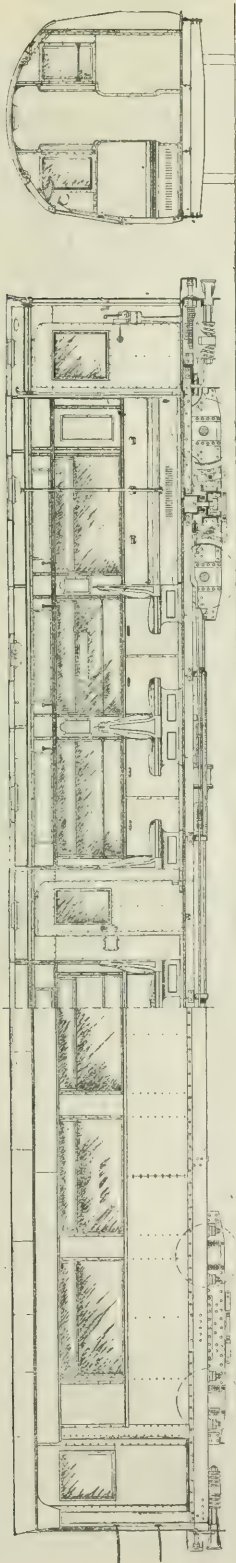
ELEVATION AND SECTION OF NEW BAKERLOO TRAILER CAR.
